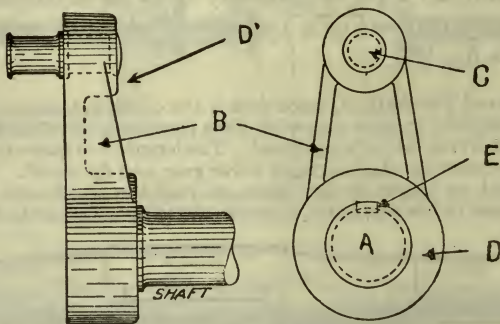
Crank end of shaft with flange instead of shoulder. With this construction the diameter of the shaft is not reduced at the crank end.
